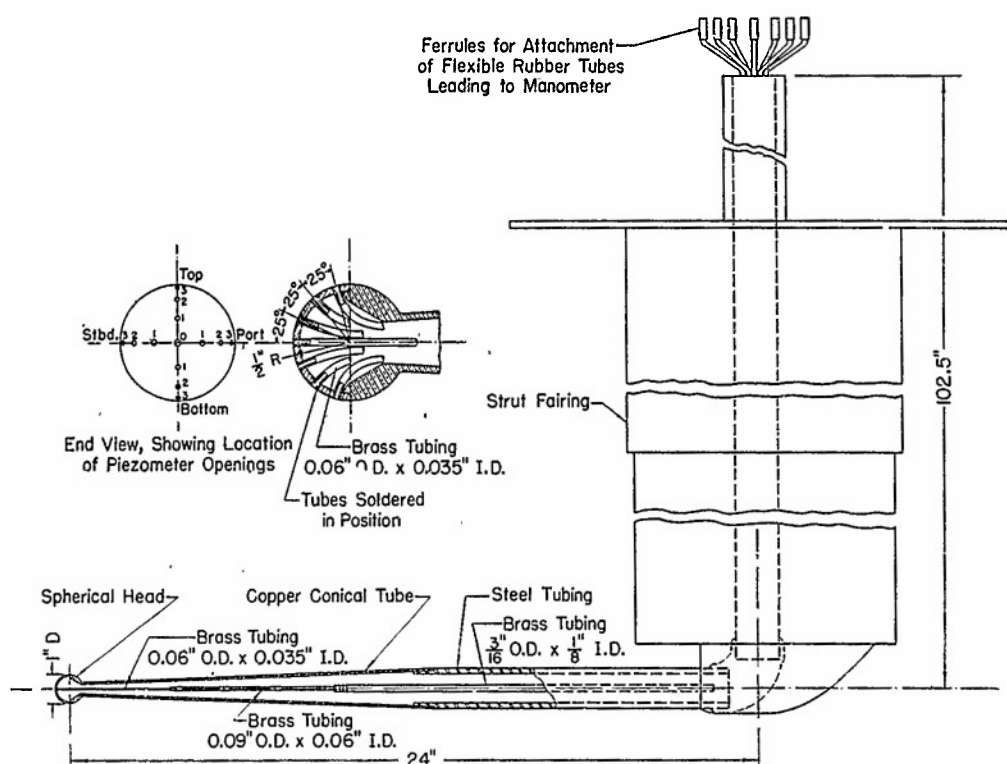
Construction Details of the 13-Hole Spherical Pitot Tube
